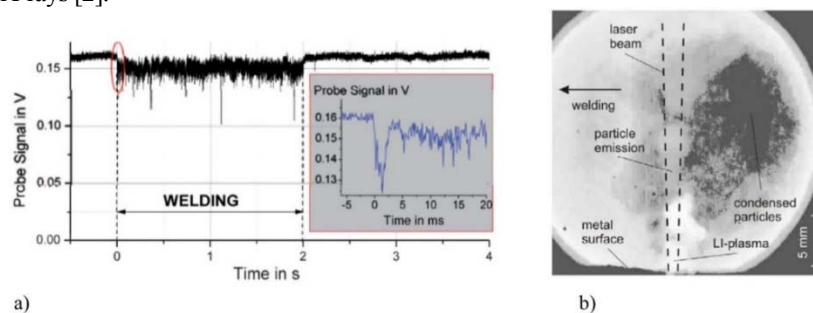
(a) Typical form of the probe beam transmission signal during welding; (b) video observation of the condensed particle cloud during the welding process.
